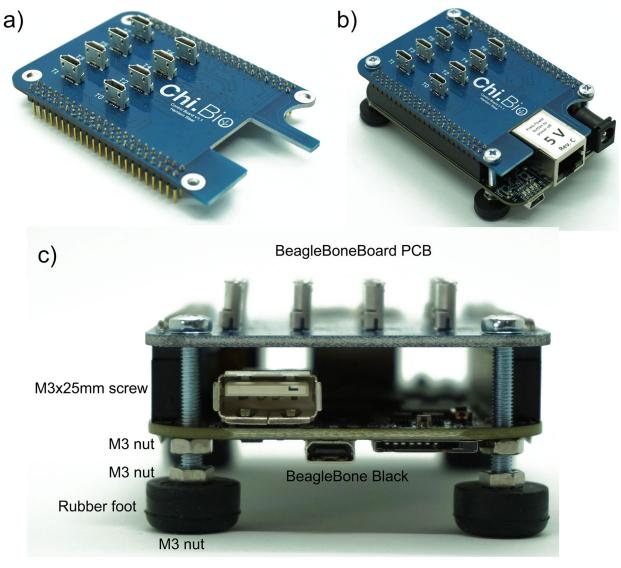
Assembly of the Chi.Bio control computer. a) BeagleBoneBoard PCB designed for Chi.Bio. b) Assembled board with BeagleBone Black microcontroller. c) Diagram of components used in assembly, summarised in the "Additional Materials" spreadsheet.
